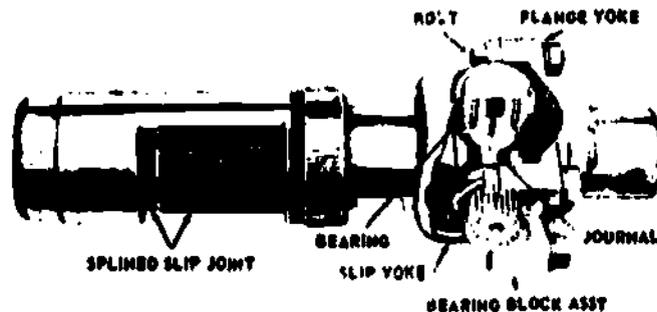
Journal-type universal joint with journal assembly in shaft and slip yoke.
